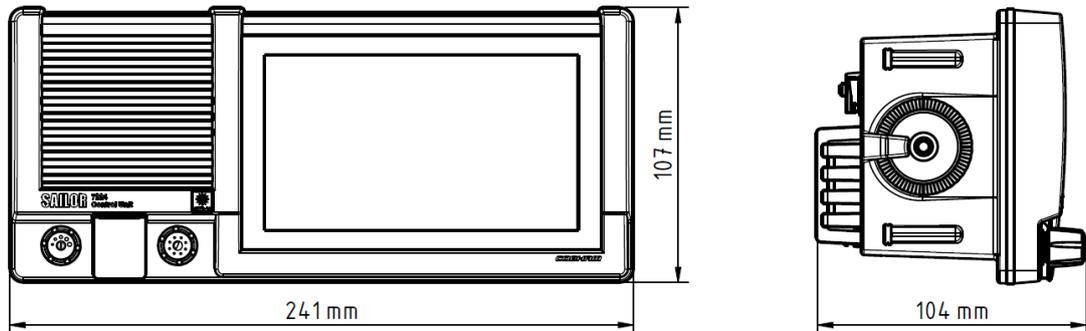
SAILOR 7224 Control Unit Dimensions for flush mount
